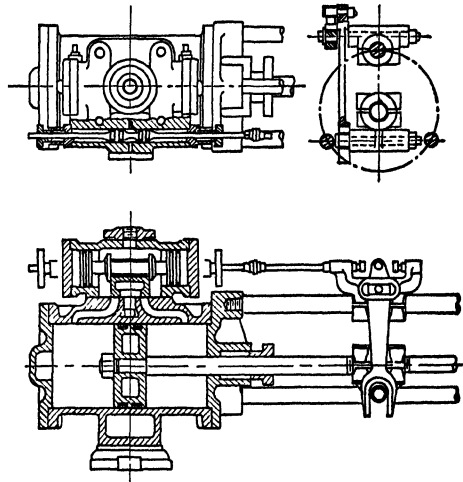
Steam end of a simplex pump with external mechanism to move the pilot valve and D main steam valve. (Courtesy of National Transit Co.)
